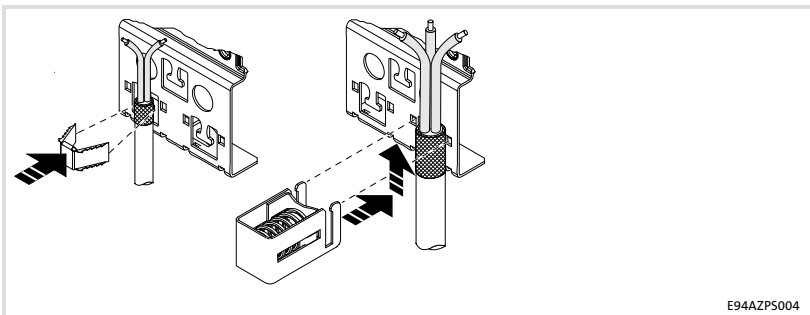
Connect the shield to the shield sheet (graphics on the right: motor cable for device sizes II and III)
